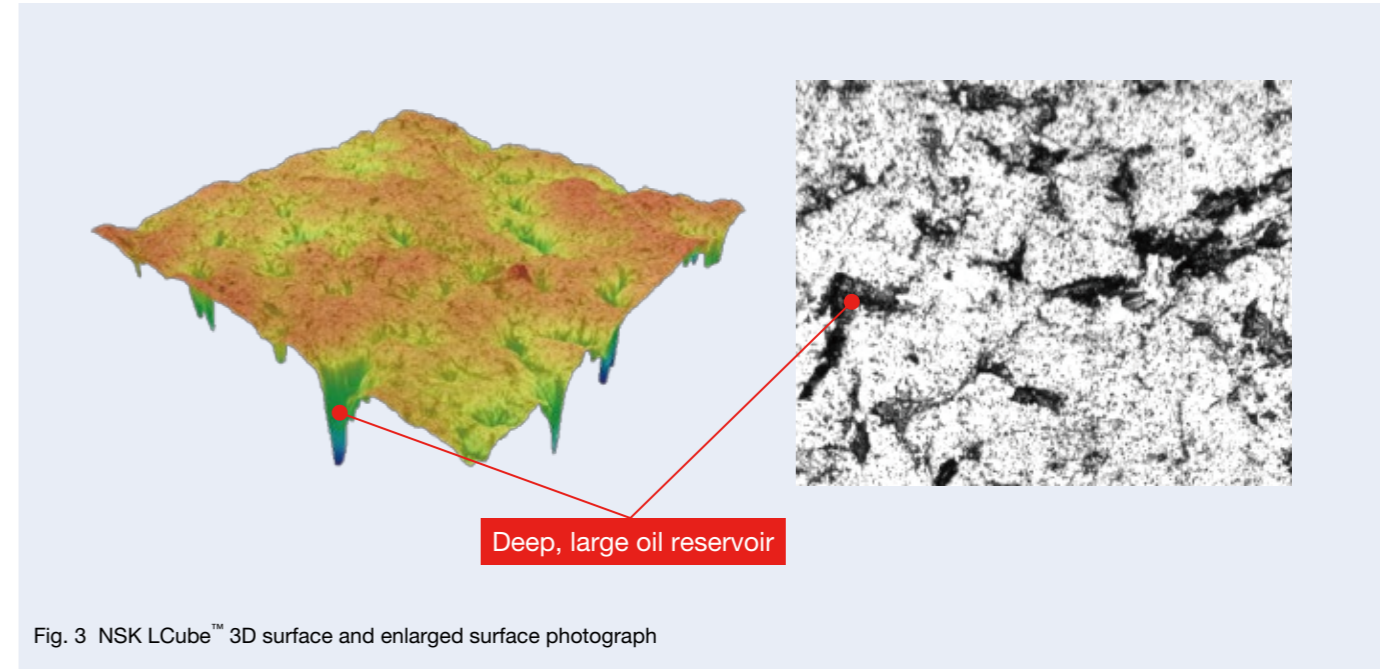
NSK LCube™ 3D surface and enlarged surface photograph
